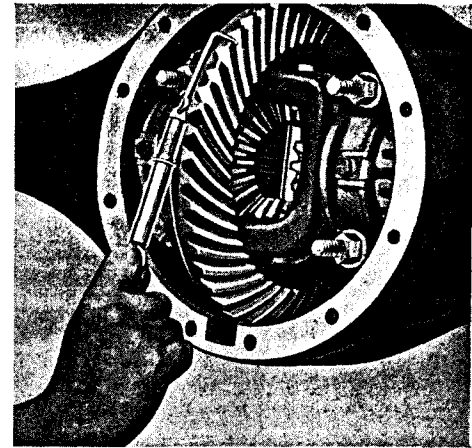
Checking adjustment of differential side bearings. A pull of 8 to 10 pounds should be required to turn the ring gear.
